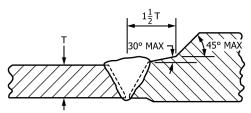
Butt Joint, Transition Between Unequal Inside and Outside Diameter Components
